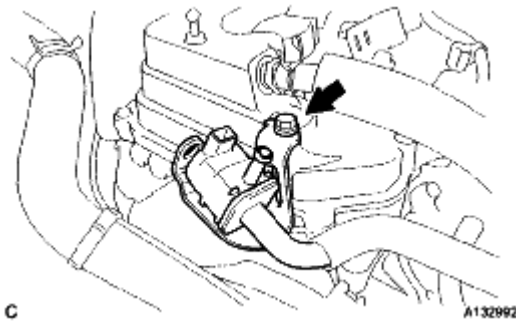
Removing Bolt And No. 1 Vacuum Switching Valve
